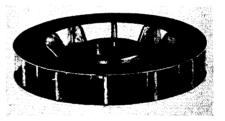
Blower assembly made by riveting a steel plate over a die-cast aluminum bottom plate and blades. More recently, spot welding has been used to make the assembly.
